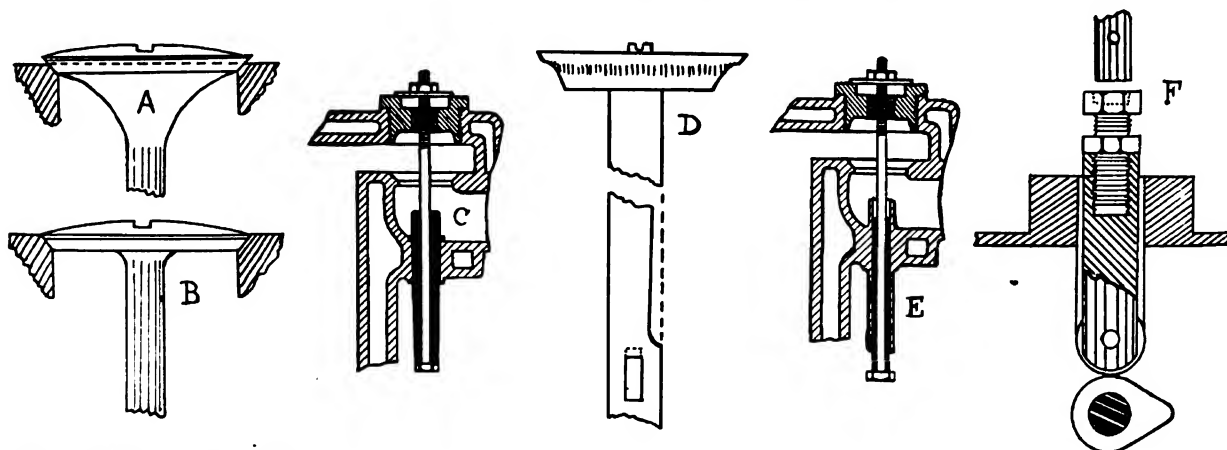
A, PROPER SEATING FOR VALVE; B, INCORRECT DESIGN; C, HOW TO REMOVE VALVE GUIDE; D, WORN VALVE STEM; E, FITTING BUSHING TO GUIDE; F, HOW TO QUIET TAPPET.
